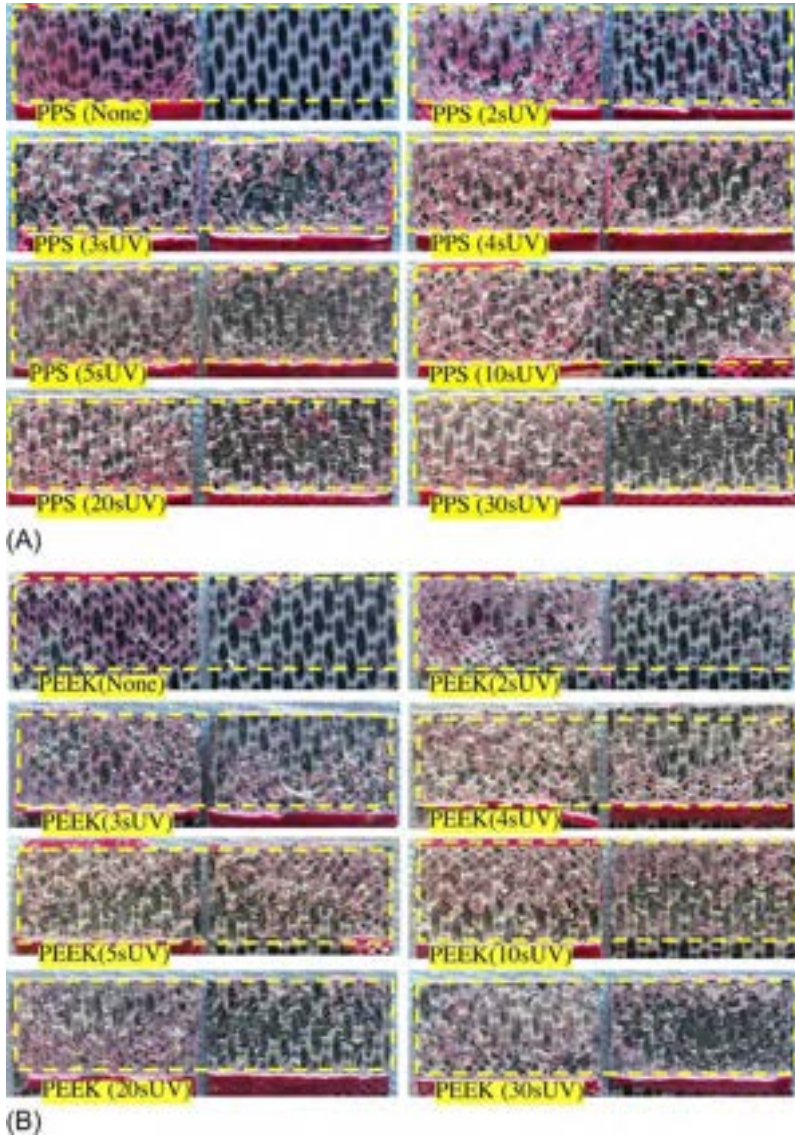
Representative photographs of the failure surfaces of the lap shear specimens of the TPC adhesive joints. (A) PPS-PPS joints; (B) PEEK-PEEK joints.
